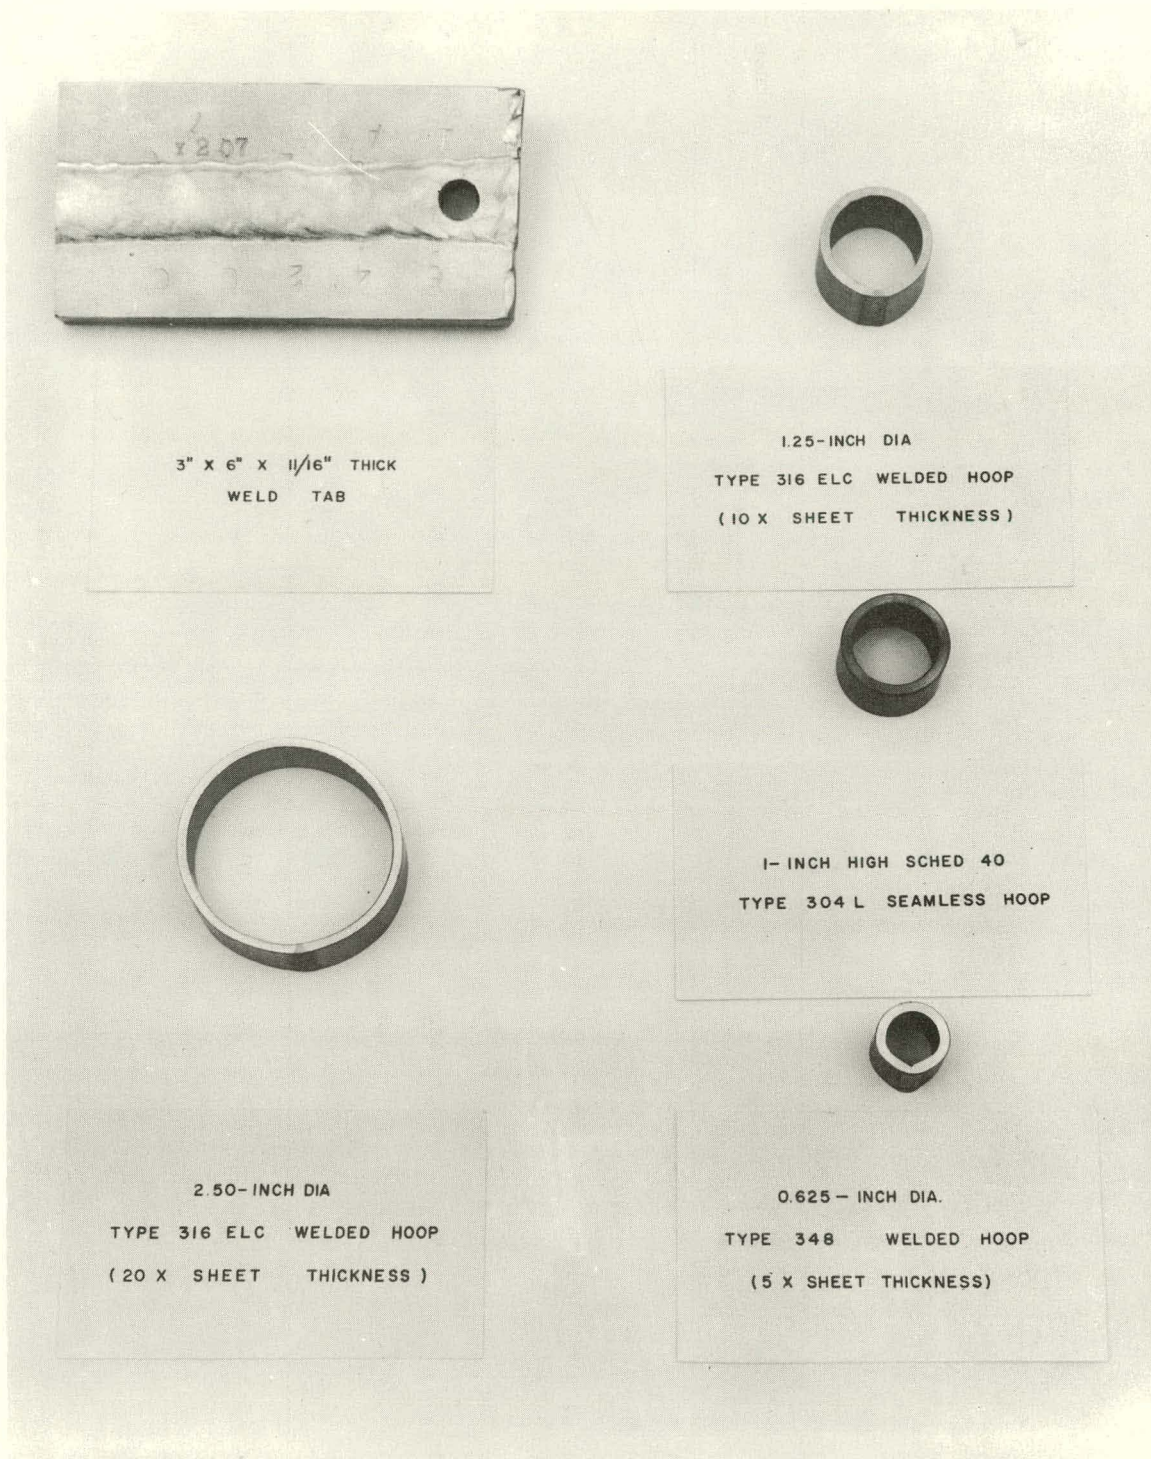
Stressed, Welded Corrosion Specimens after Exposure
